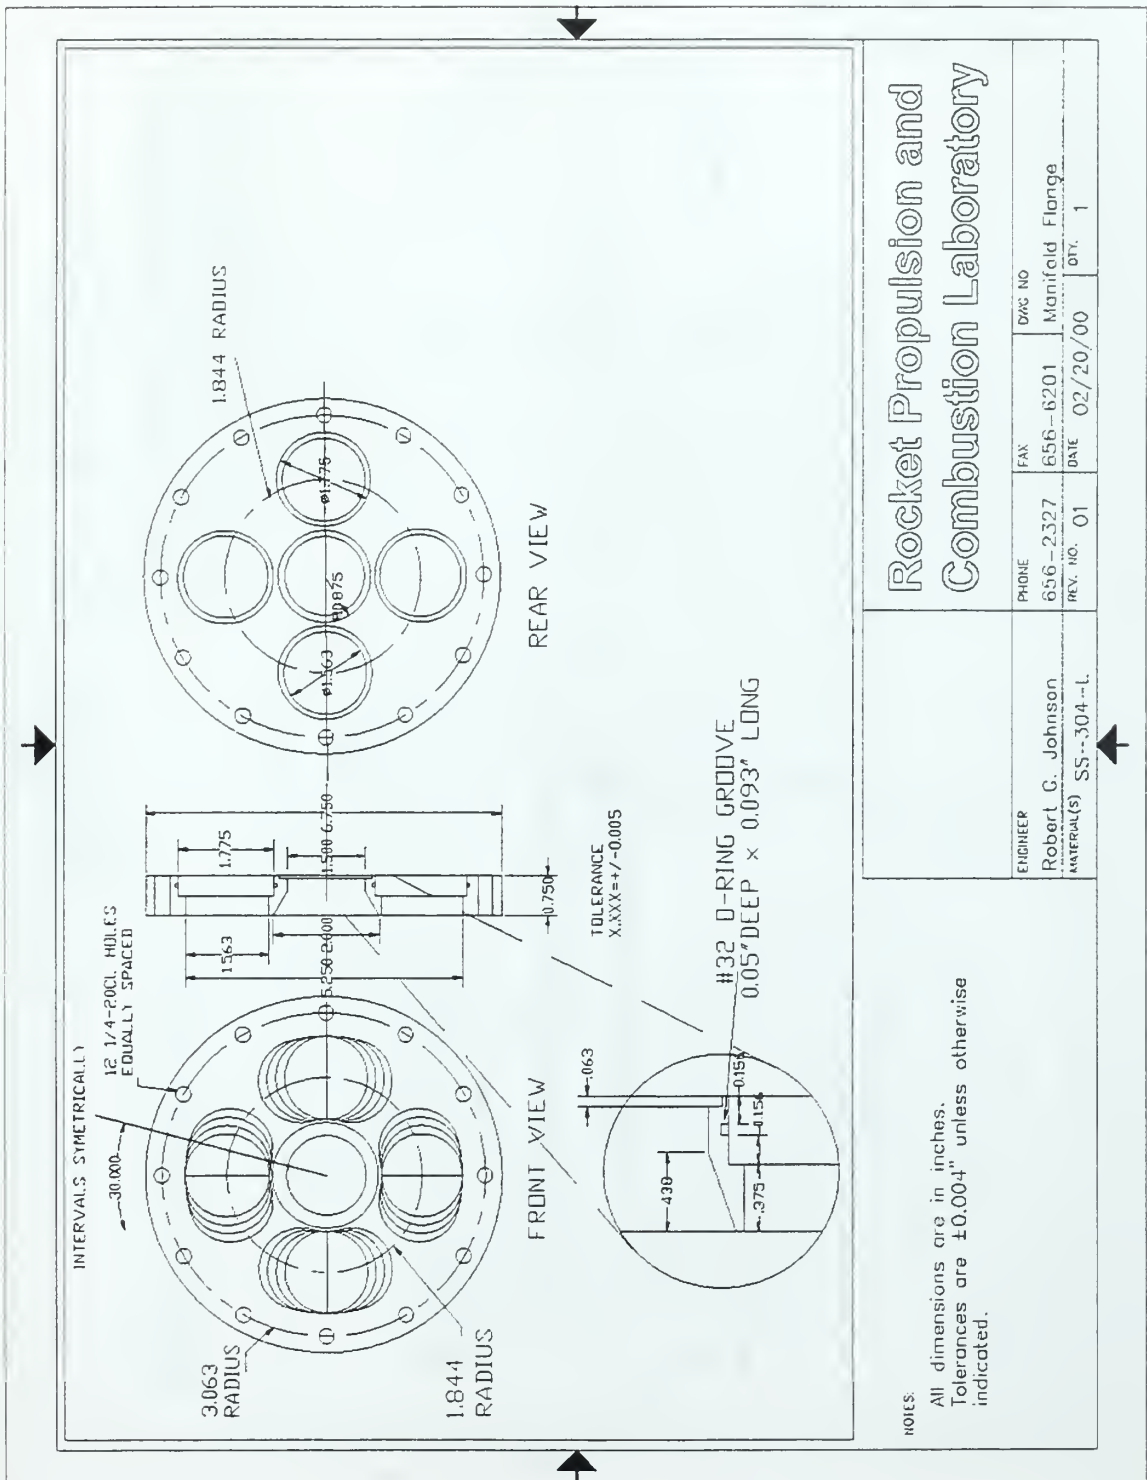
The manifold flange connected the four main air arms and the pre-detonation tube to the main combustion tube flange.
